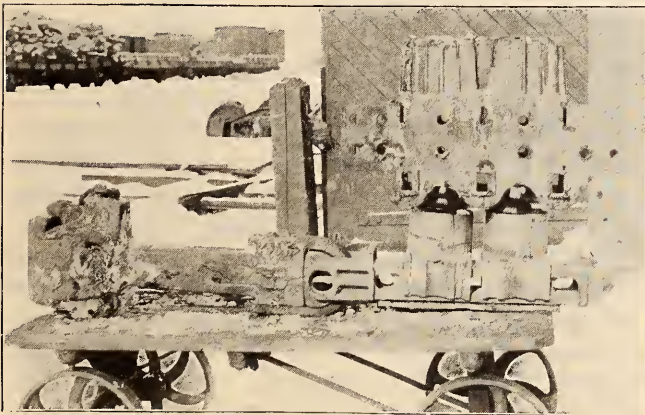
HENNESSEY FRICTION DRAFT GEAR, C., M. & ST. P. RY., COAL CAR.
